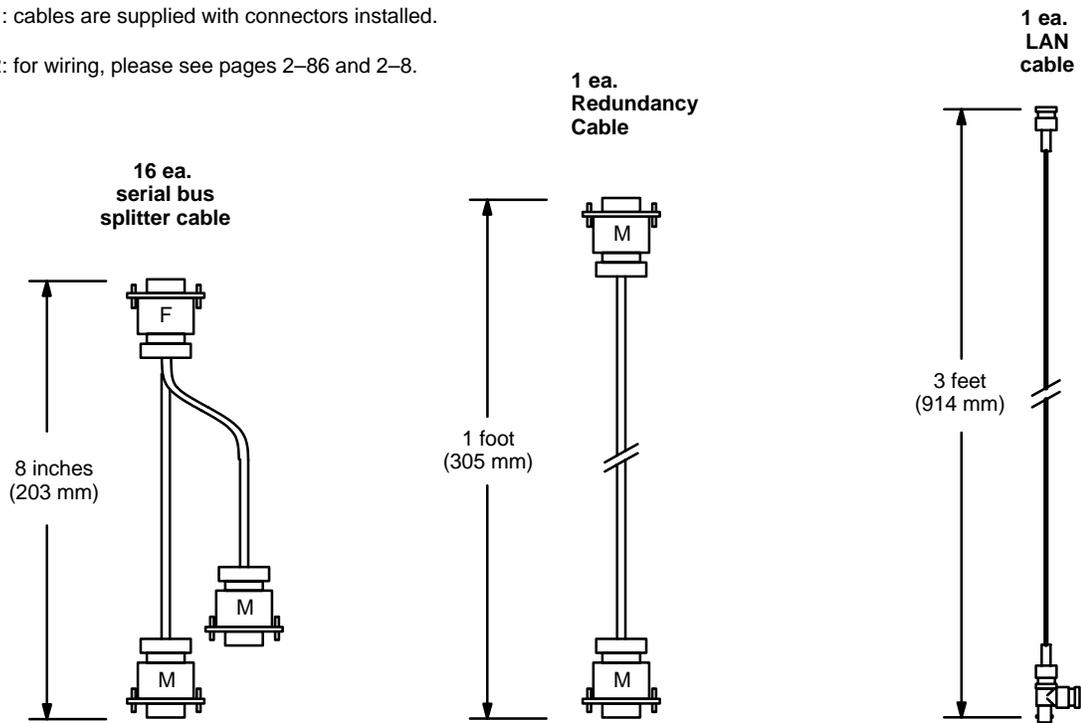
SI 3000 redundancy kit cables. Kit part no. 44-045839-001.
